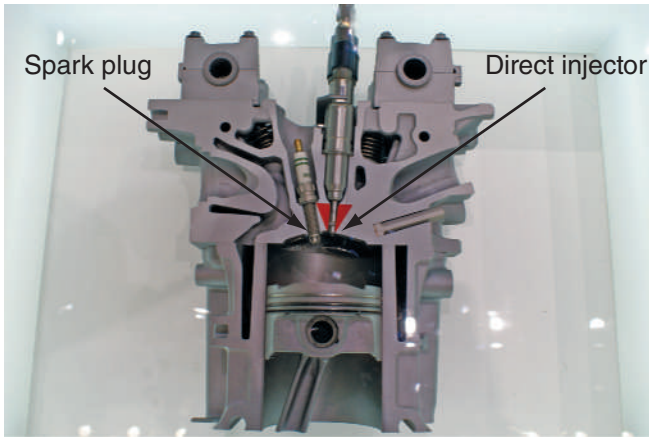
The direct injector is placed in the combustion chamber so that its spray of fuel is aimed at the spark plug.
